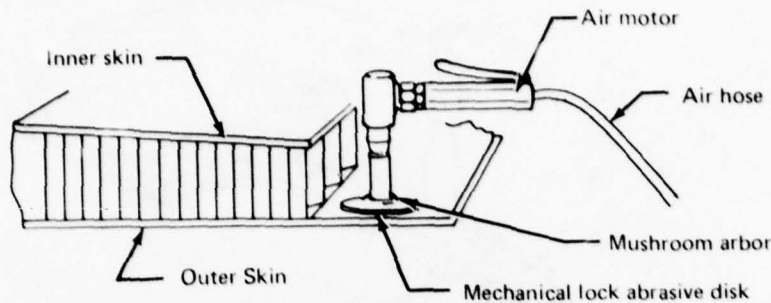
Smoothing Adhesive Surface With Abrasive Disk
